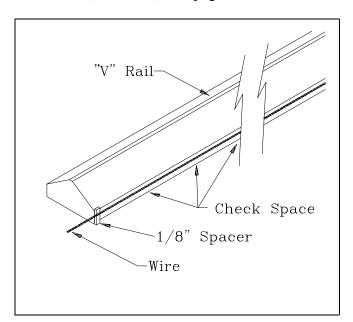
Checking "V" Rails For Straight (Linear Alignment)
